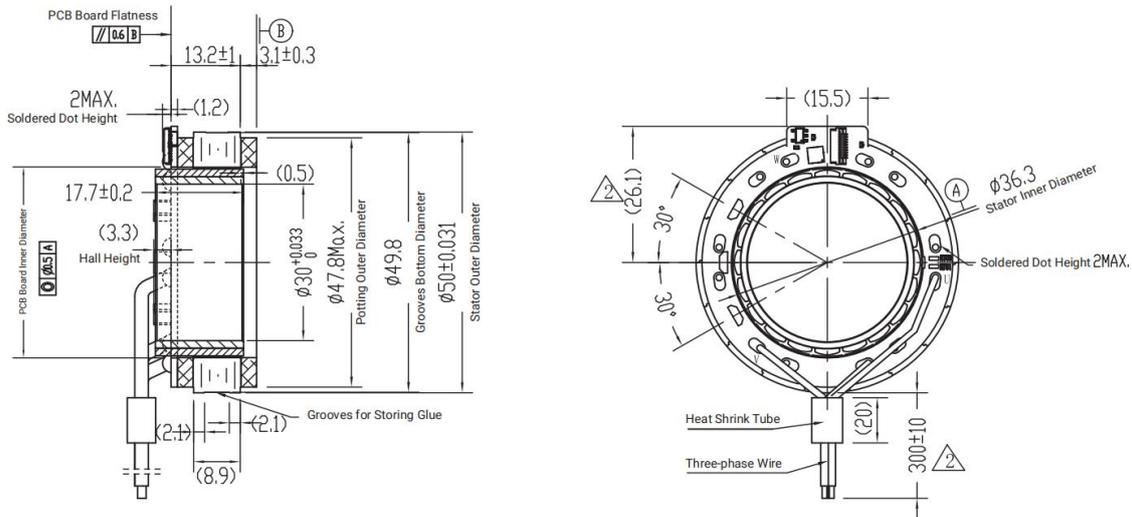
RMD-FL-50-08-180 appearance dimension drawing
